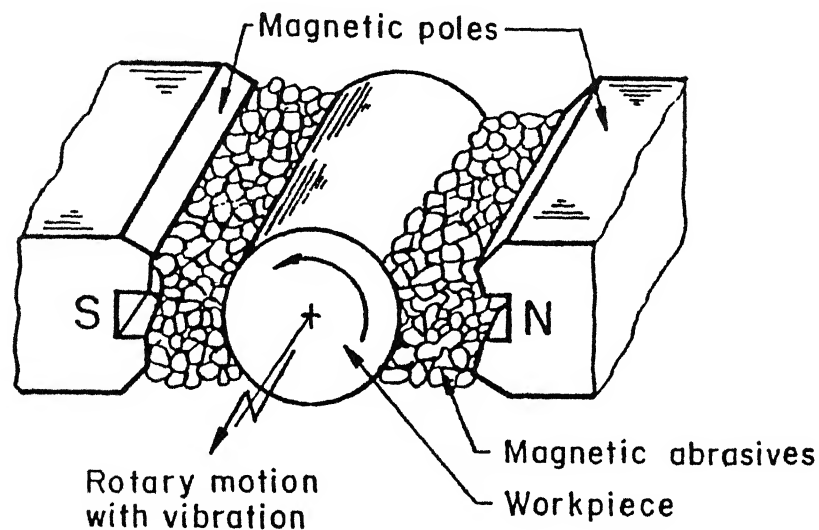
Schematic view of magnetic abrasive finishing (MAF) [8]
